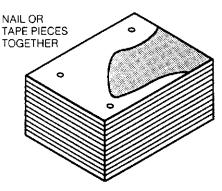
Pad sawing is another way to produce many similar pieces. The pad of individual pieces is held together with nails or with tape.
